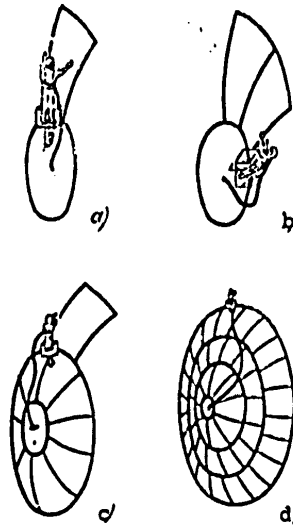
Sequence of Antenna Assembly: a -- beginning of assembly; b -- assembly of first row; c -- assembly of second row; d -- end of assembly
